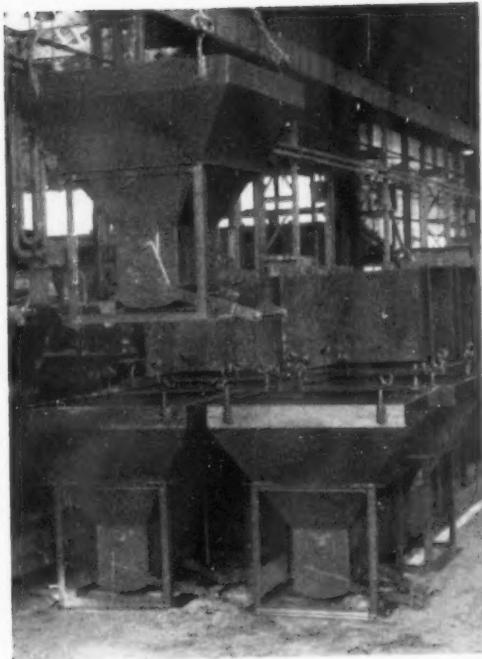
(above).—Concrete pouring skips awaiting delivery. The skips are manufactured in four sections with the top lip and shute at bottom formed in a press brake. The four sides are then electric-welded at the seams
